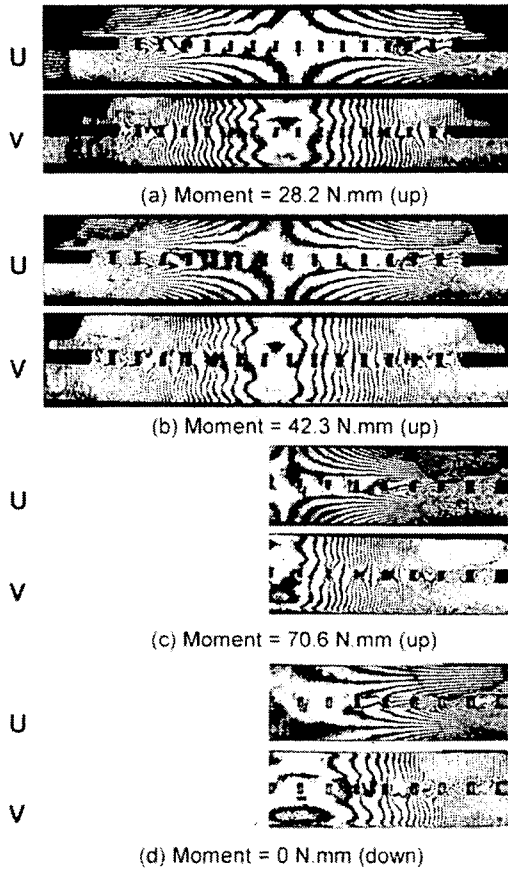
Fringe patterns of the WB-PBGA package assembly in four point bending
